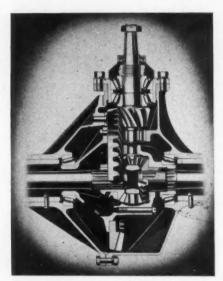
Showing arrangement of final drive gears and motor truck differential in Timken bevel gear rear axle
